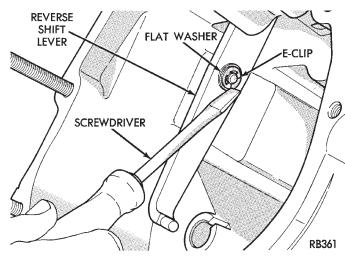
Remove or Install Reverse Shift Lever E-Clip
